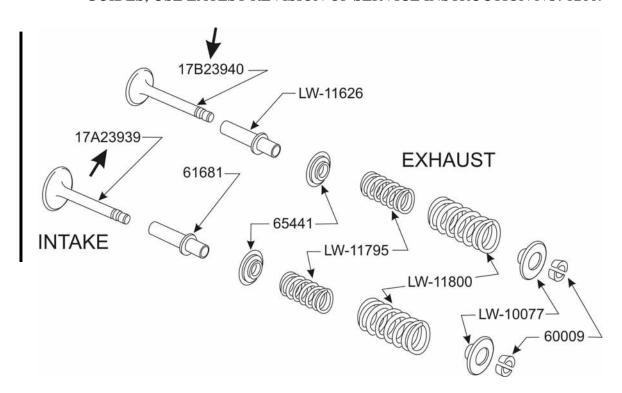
Intake and Exhaust Valve Components Showing Order of Assembly
